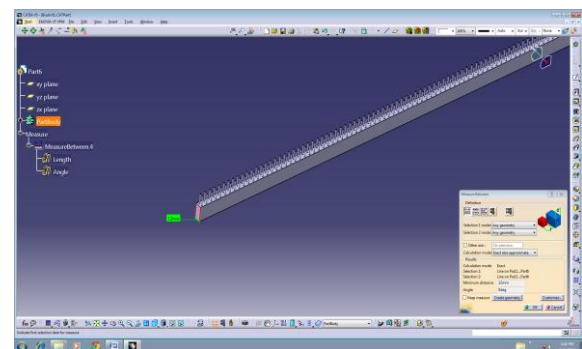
General Arrangement Drawing of Brush for Belt Cleaning
